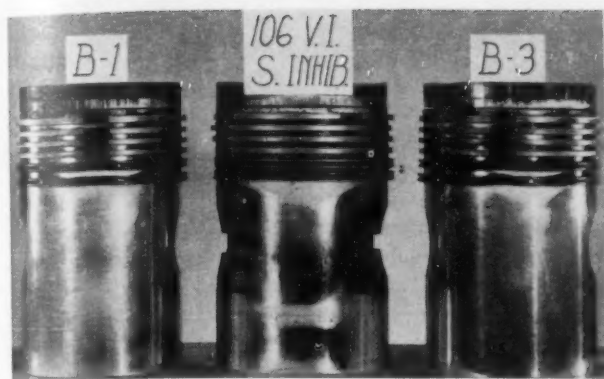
Single-cylinder diesel engine pistons after 480-hr test runs
